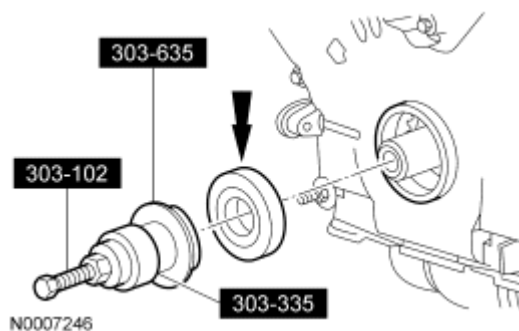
Installing Crankshaft Front Seal Using Special Tools (303-102, 303-335, 303-635)
